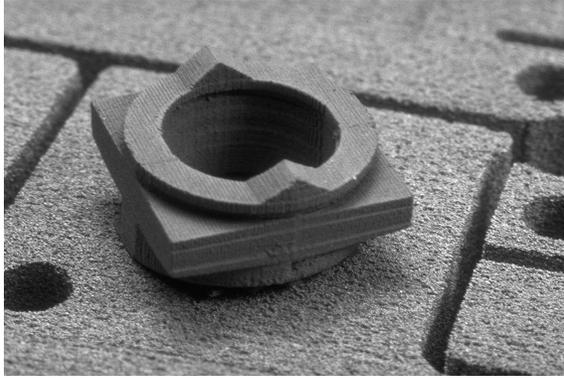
A stainless steel green part made of - 20µm powder, using 50µm layers. The component is 10mm on a side. The component is sitting on top of a 3D printed part, which is made with 60µm powder.
